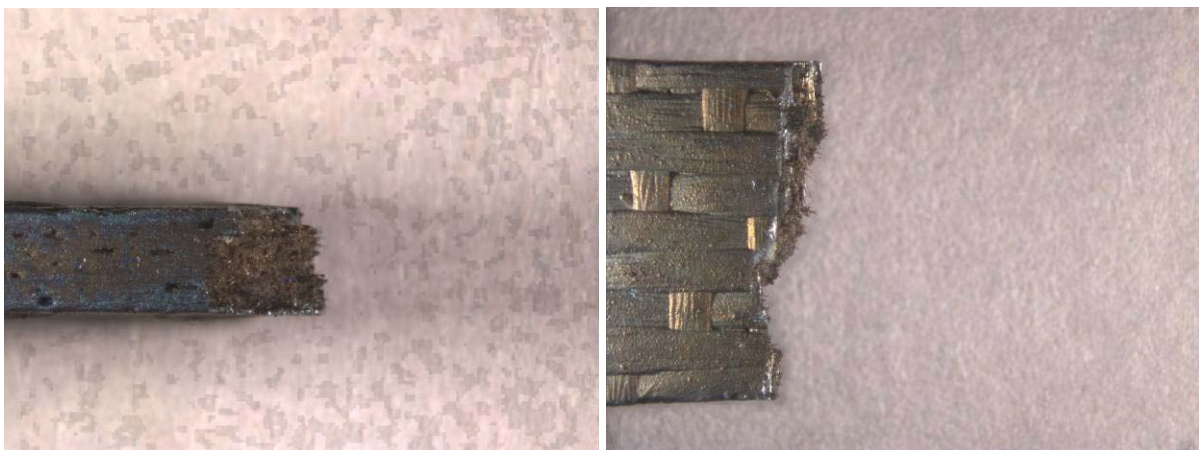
Optical Micrographs of the fracture surfaces produced in tensile test to failure conducted at 0.05mm/sec at 1200 °C in air on specimen P2-4.
